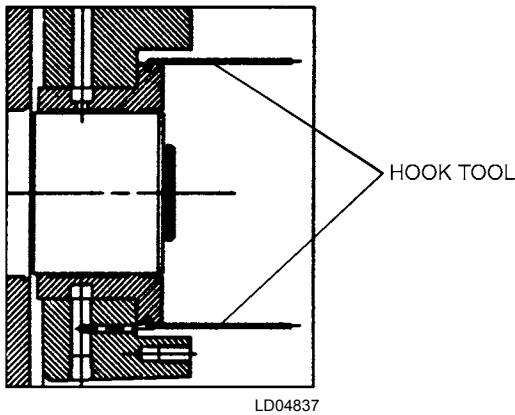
LOW-SPEED THRUST BEARING REMOVED
